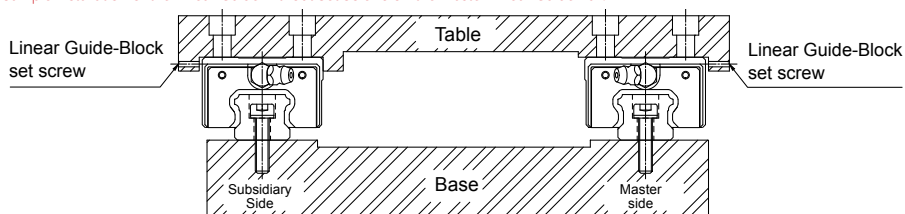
Mounting the Linear Guide without Set Screws on the Master Linear Guide Rail
